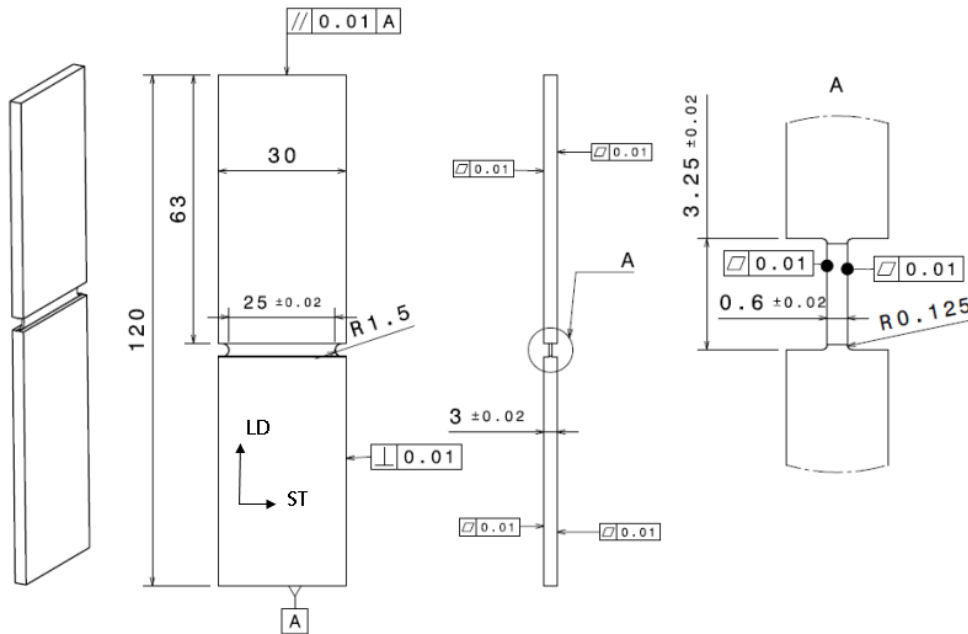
Geometry and dimensions of plane strain, shear and Bauschinger specimens (dimensions in mm).
